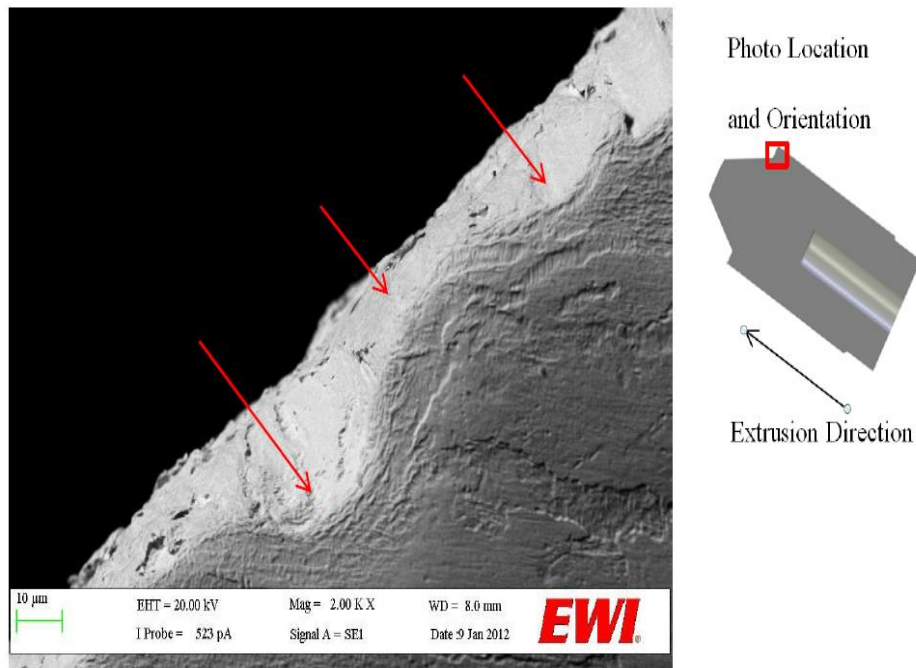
SEM photo of the shoulder shows a rolling pattern, suggesting abrasive wear [67]
